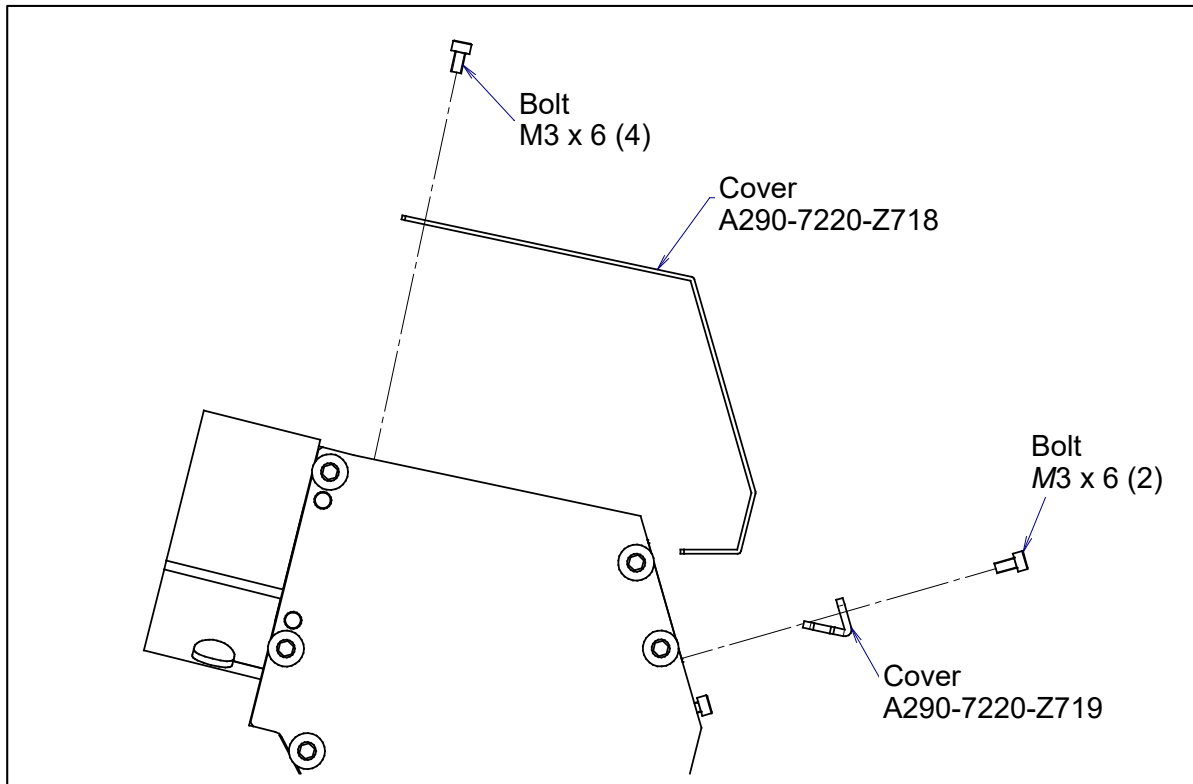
(c) Replacing motor cover (Servo torch for TIG)
